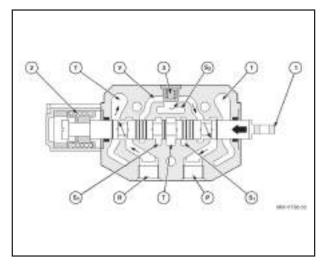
CONTROL VALVE SECTION OIL FLOW - CYLINDER RETRACTING
